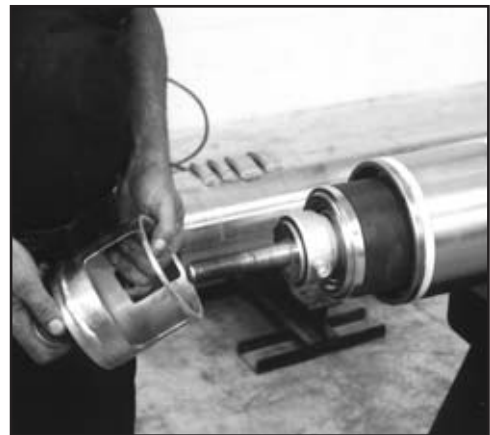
REMOVE DISASSEMBLY TOOL COVER
